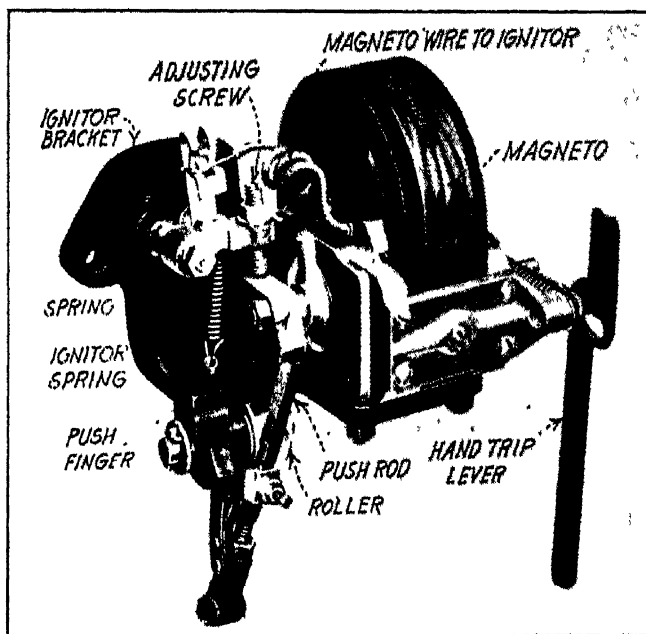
Webster tri-polar oscillator magneto with ignition bracket and trip mechanism.
